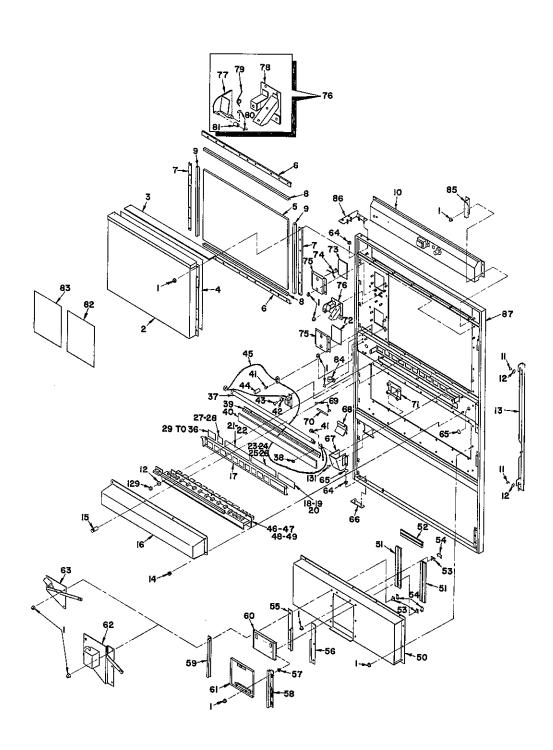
A — DOOR ASSEMBLY ALL MODELS EXCEPT ROWE AWARD
